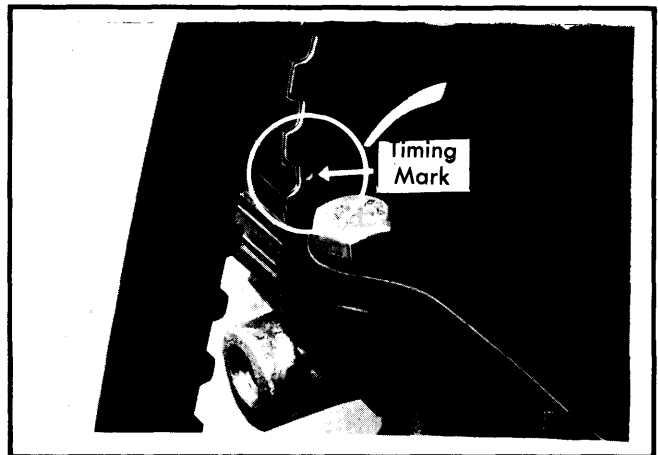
Camshaft Drive Sprocket Timing Mark Alignment
